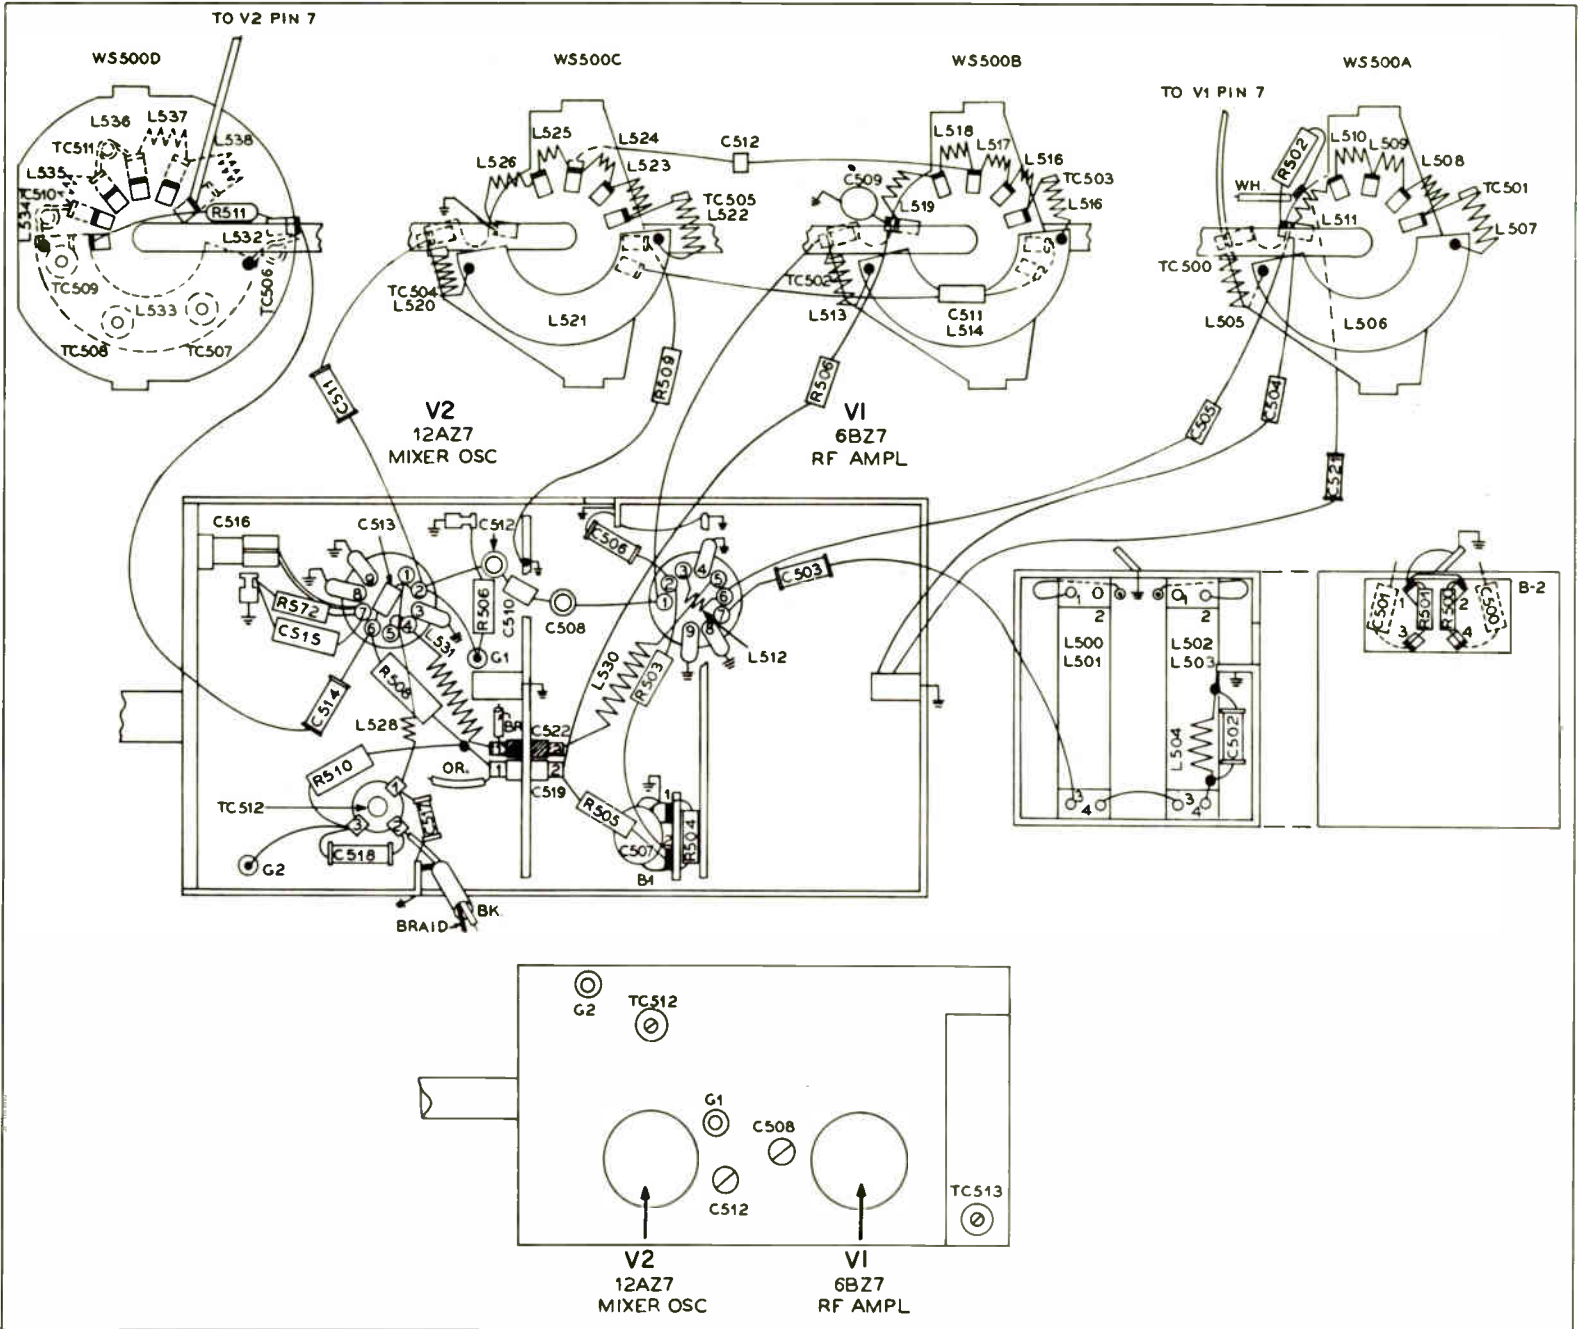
Television Tuner, Part No. 76-7664, Base Layout
